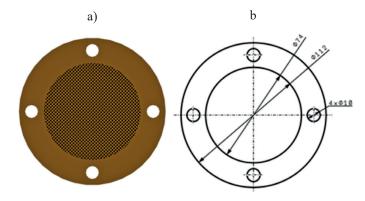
a) Scheme of tested sample; b) tested sample dimensions
